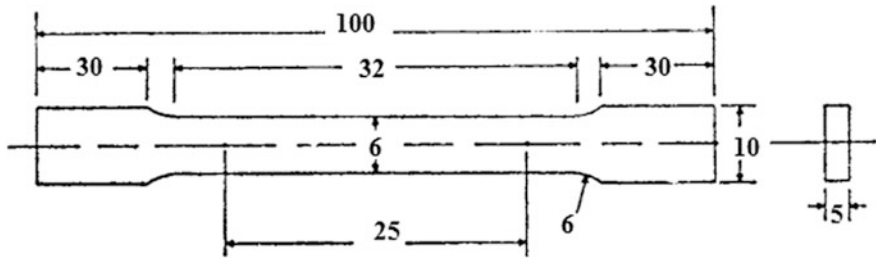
Drawing of the tensile sample fabricated as per the ASTM E8/8M standard
